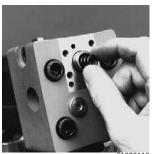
Install HC Control Start Adjuster Spring
